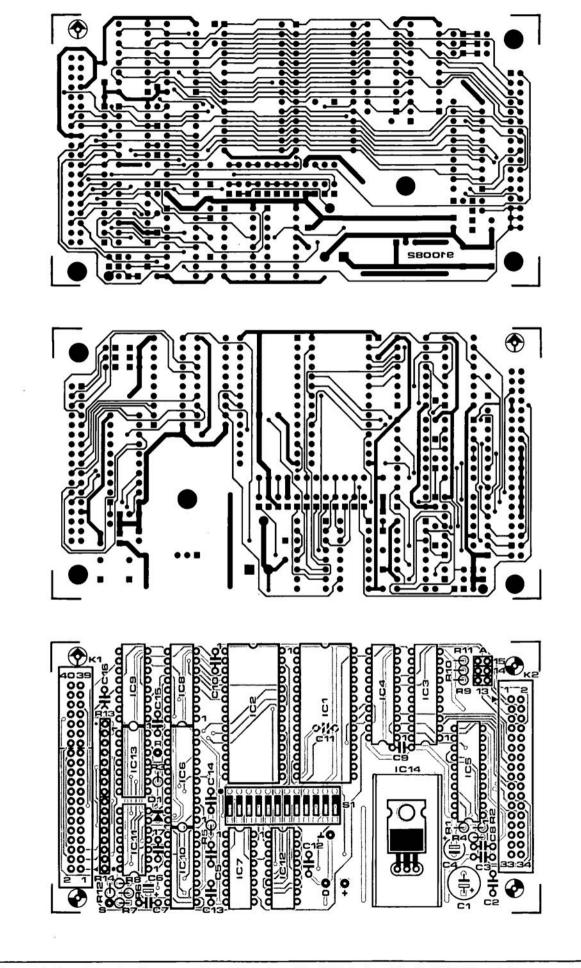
Track layouts (mirror images) and component mounting plan of the PCB designed for the EPROM emulator.
